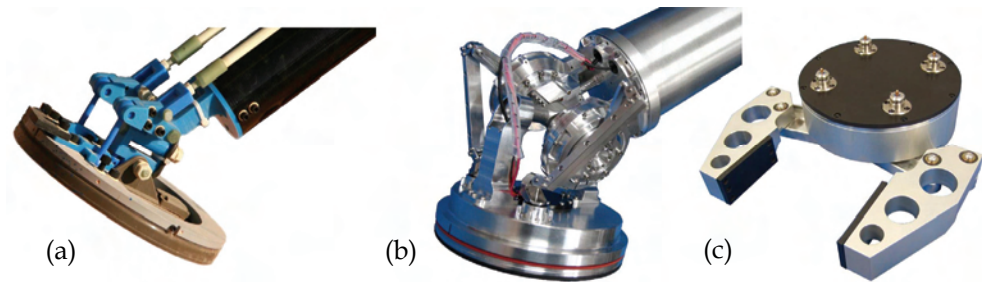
Metal-free wrist mechanism with metal detector (a), heavy payload wrist mechanism with tool-changer (b), gripper compatible with tool-changer (c)
